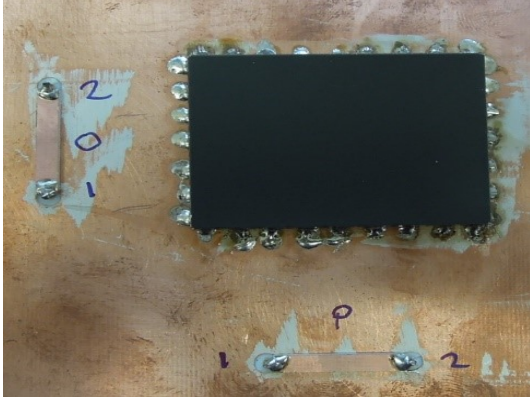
PCBS (size 38 mm x 50 mm) installed on the measurement jig.
